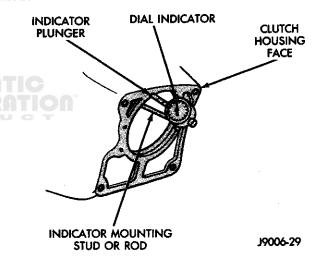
Measuring Clutch Housing Face Runout CORRECTING CLUTCH HOUSING FACE
